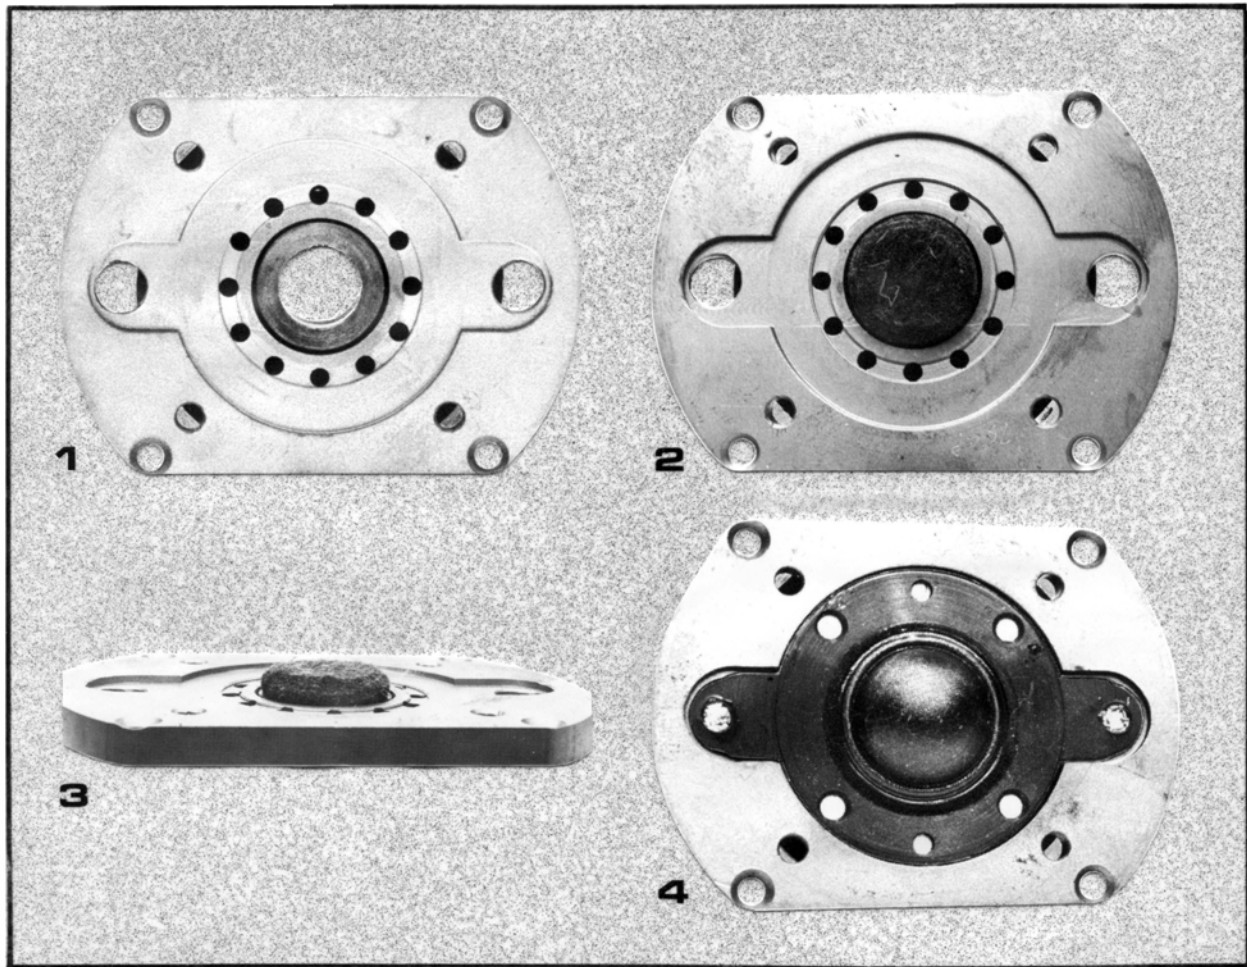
The tweeter assembly is shown in three stages of assembly. Illustration 1 shows the magnet assembly only. Note the large hole extending through the center pole piece. Illustrations 2 and 3 show the felt damping plug in place. Also seen is the milled recess in the magnet front plate. As shown in 4, this recess allows the dome/voice coil assembly to be fitted flush with the periphery of the front plate. When mounted in the tweeter head, the assembly presents no discontinuities in the form of mounting screws or other hardware which would act as a 'secondary radiation source' because of diffraction effects. In this regard, the complete assembly is representative of the current state-of-the-art. Finally, note the vent holes behind the dome's surround. These provide the same sort of benefit as the hole though the center pole, and are similarly felt-loaded.
